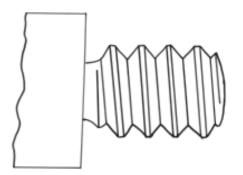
Your finished outside thread should look something like this. You want good sharp "V" bottoms to your threads, but you do not want a sharp "V" on the top of the thread. Each thread should have a little flat. A sharp edge is easy to chip.
